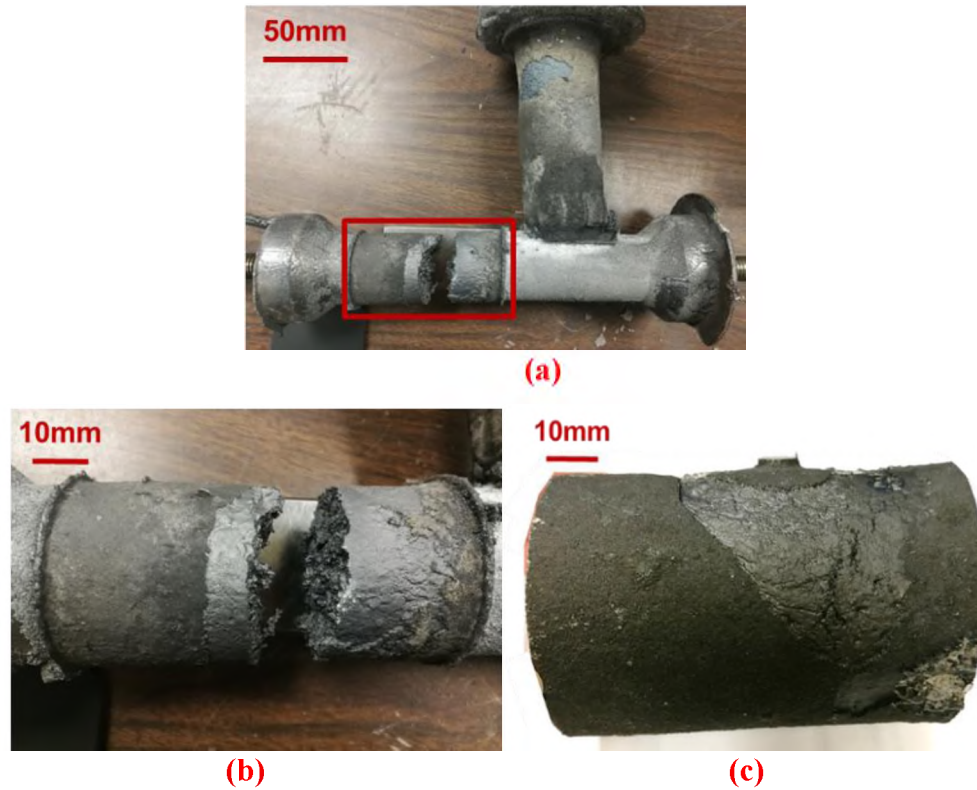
Results of the casting: (a) Complete casting after Test 1, (b) insulated area after Test 1, and (c) insulated area after Test 2.
